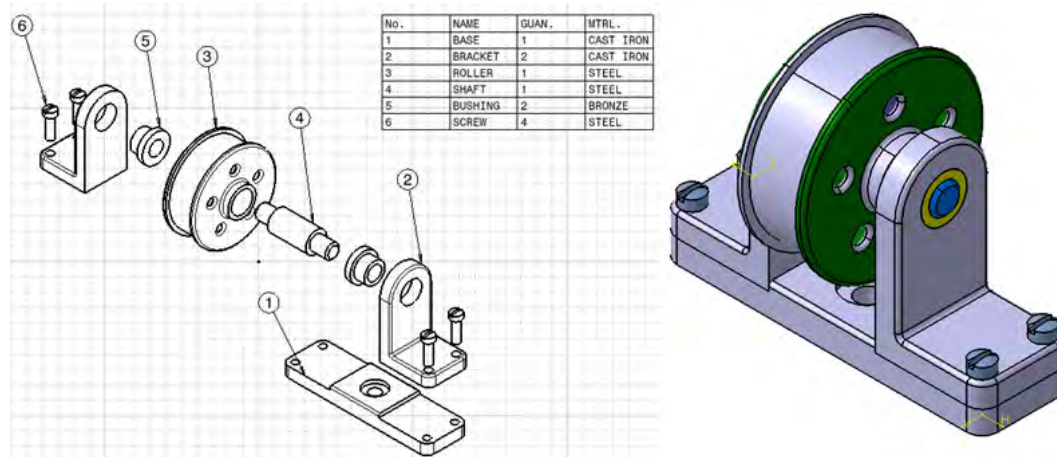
Exploded view of the roller guide and 3-D view of the roller guide
